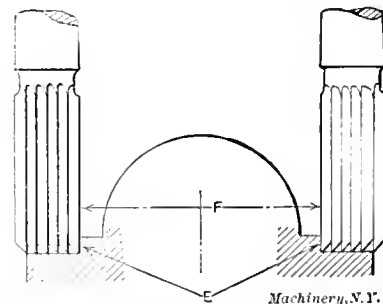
Example of Use of Double Spindle Milling Attachment.
